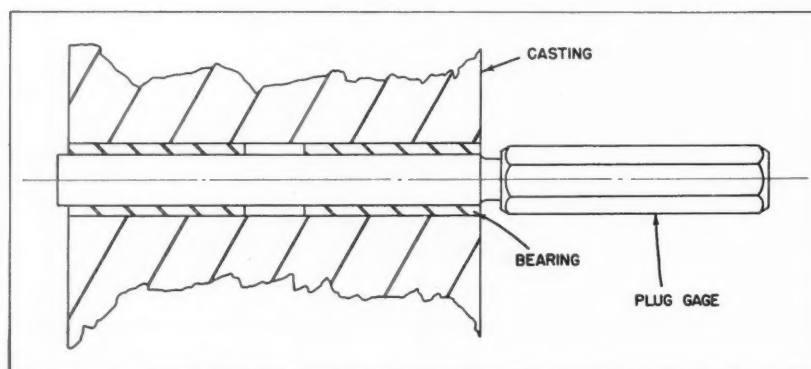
Diagrammatic sketch illustrating the way in which a plug gage performs a functional check of a refrigerator compressor bearing
